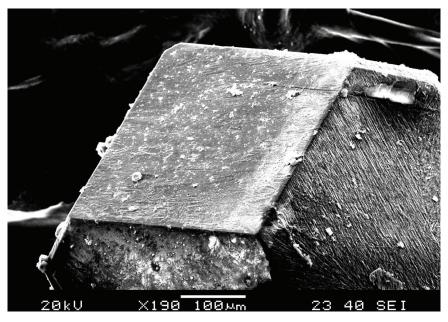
Crack in the brazed diamond grains with embedding depth of 20%.
